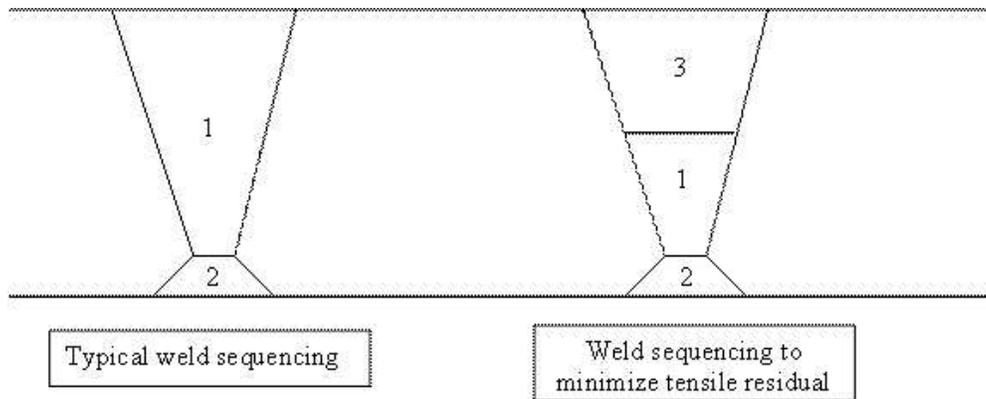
Example of changing weld sequencing to improve residual stresses
